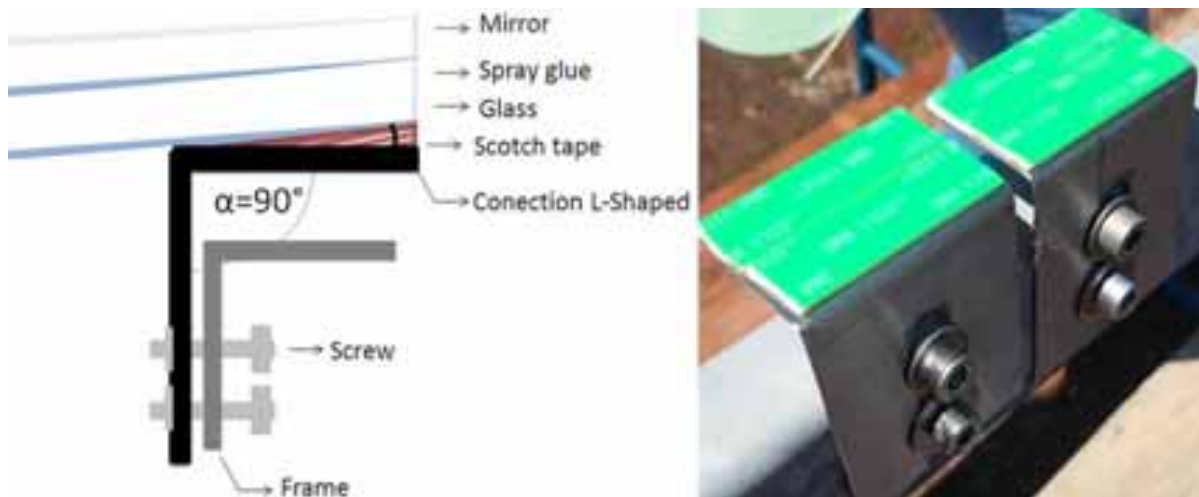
"L"-shaped metal sheets as flexible connection between steel frame and mirror stripes.
